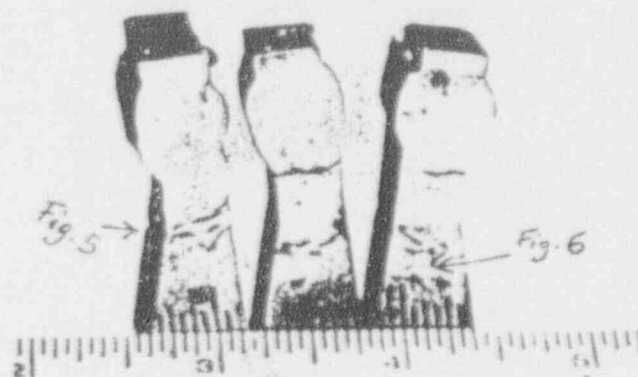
Metallographic samples taken from the 8" weld neck flange that leaked during hydrostatic testing. The neck of the flange was radiographed near the weld joining it to the pipe and a area 110 mm long was found with crack-like indications and cavities or porous. These were oxide inclusions embedded in the metal at the neck of the flange.
